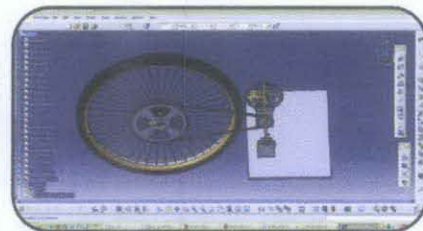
CATIA set of sprockets part only (Steel material)
